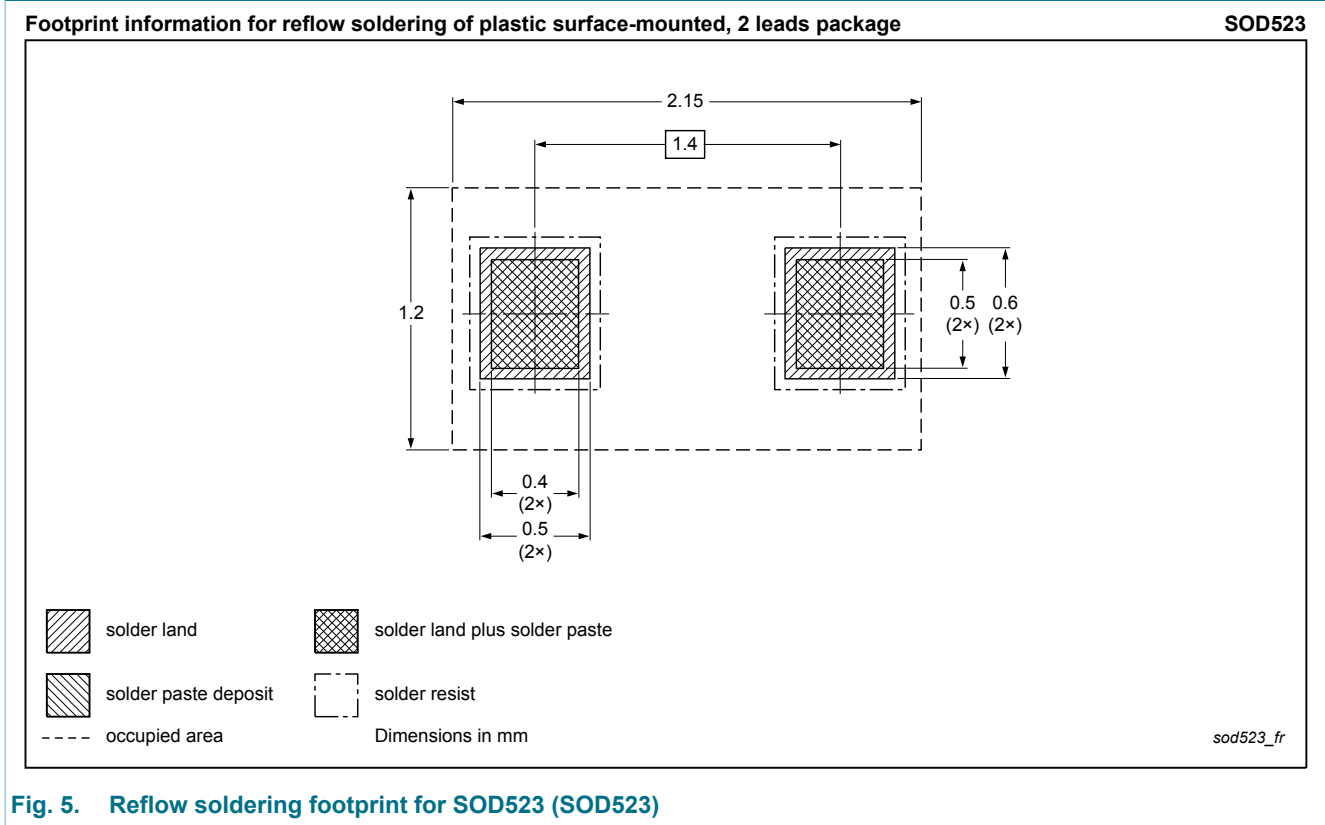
Reflow soldering footprint for SOD523 (SOD523)
